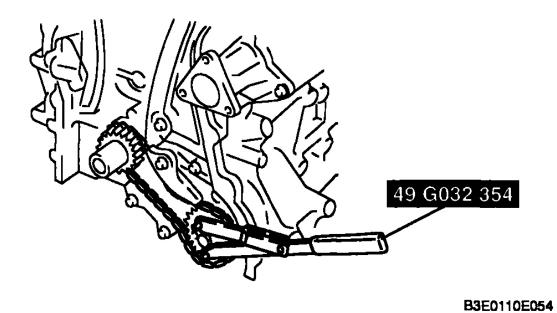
Disassembling Chain Tensioner Courtesy of MAZDA MOTORS CORP.
